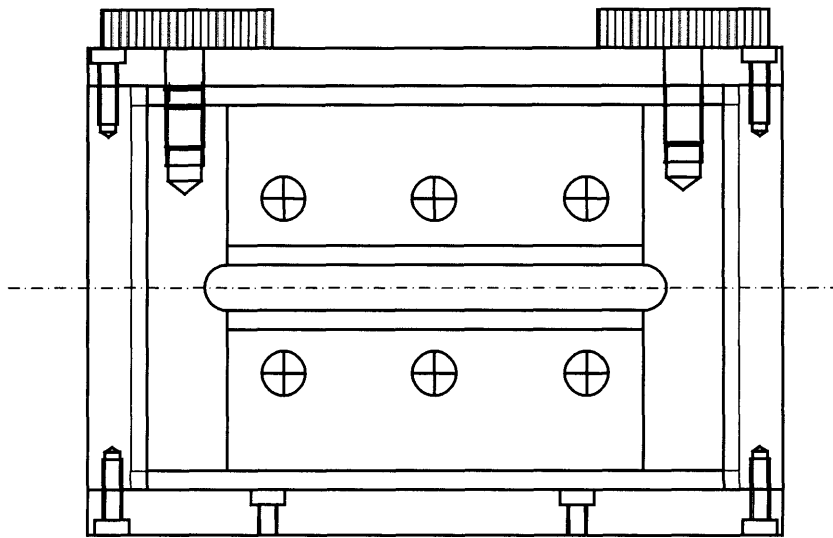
Schematic diagram of laser welding equipment.
